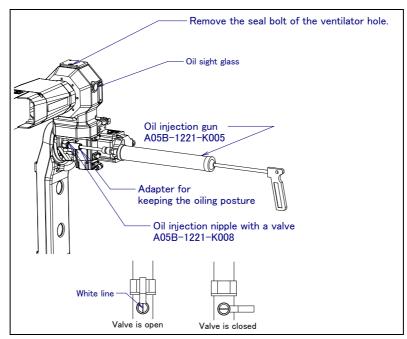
(d) Oil injection by oil gun (oiling of J4-axis gearbox)
